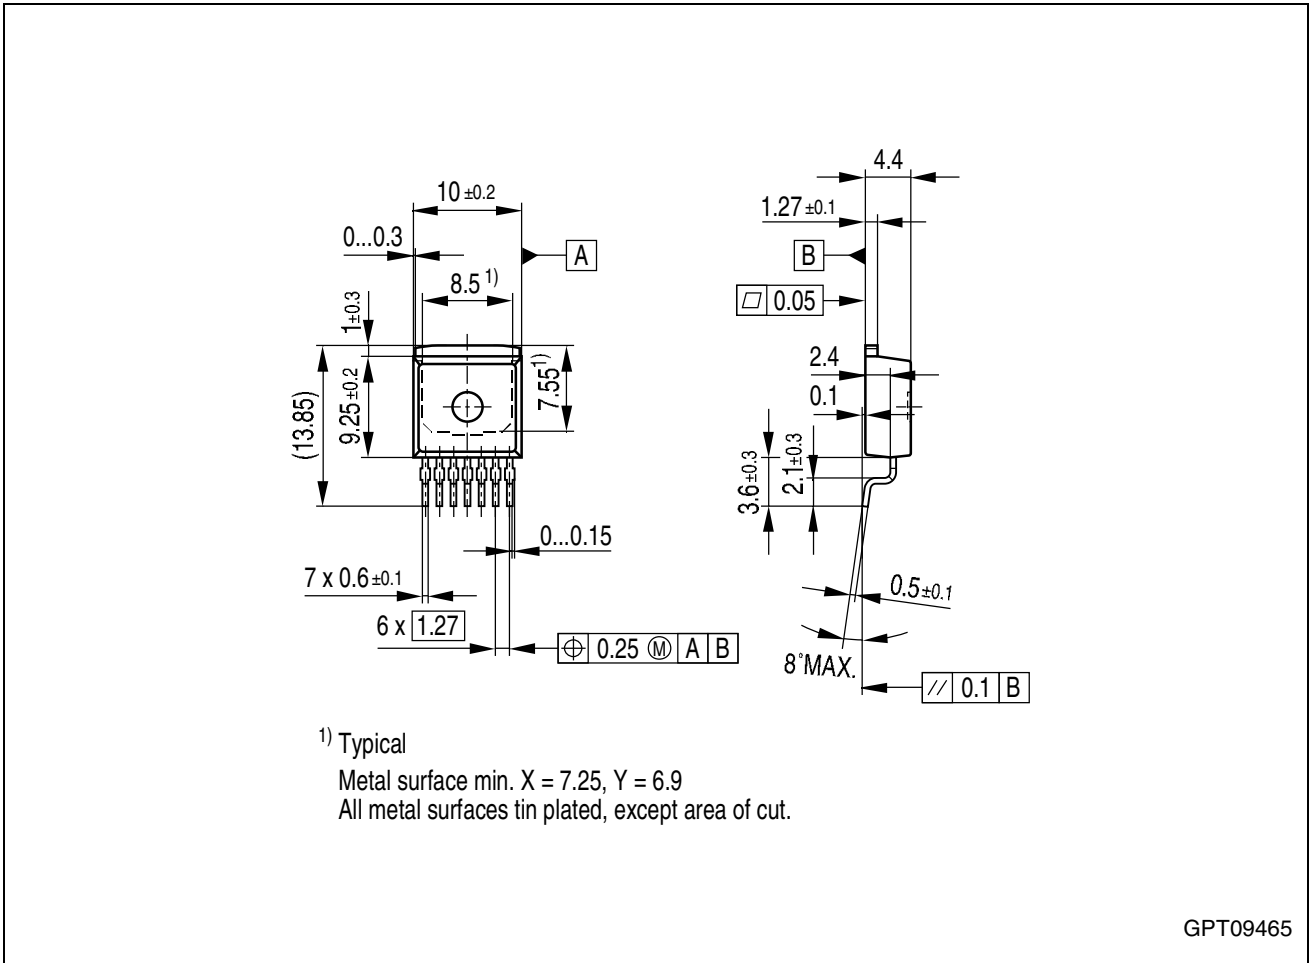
P-TO220-7-4 (Plastic Transistor Single Outline)
